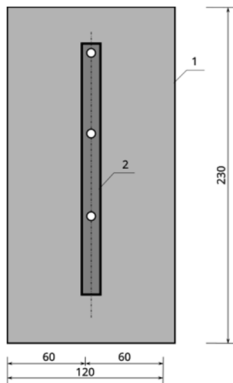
Working element for 600 mm trowels from Pro-Masz, size 230x120 mm, 1 – surface of the working element, 2 – mounting
